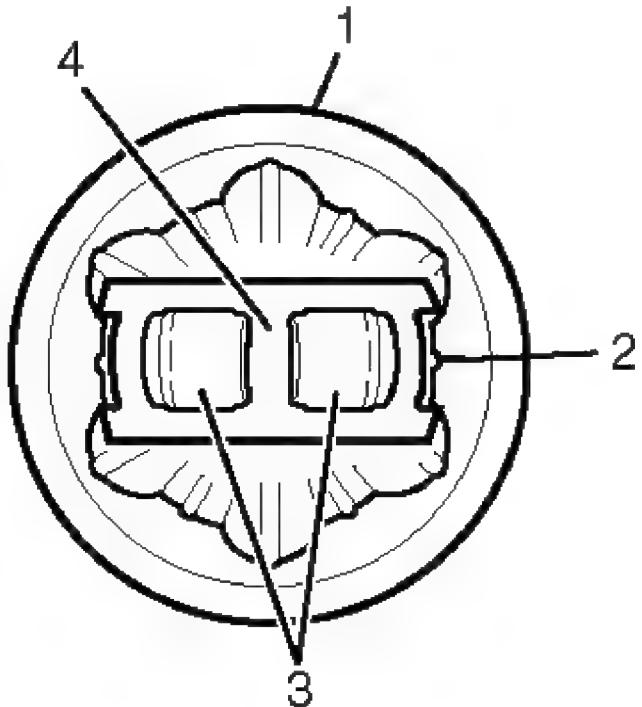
View Of Outer Race, Inner Race, Cage Window & CV Joint Cage
